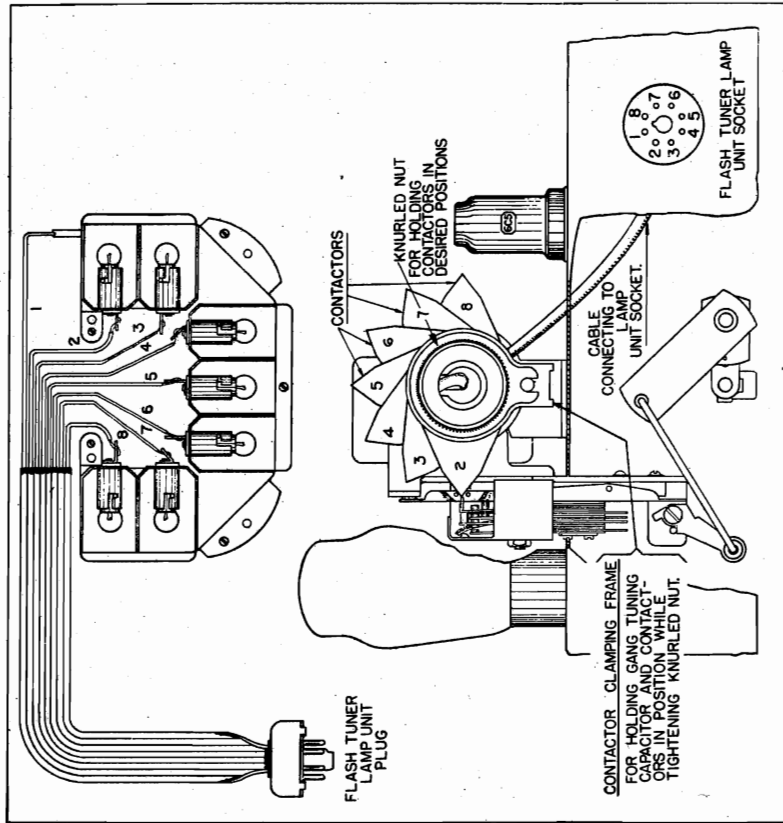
Showing Flash Tuner Lamp Unit With Escutcheon Plate Removed (Top Figure) and Rear View of Receiver Showing Flash Tuner Mechanism (Bottom Figure).
